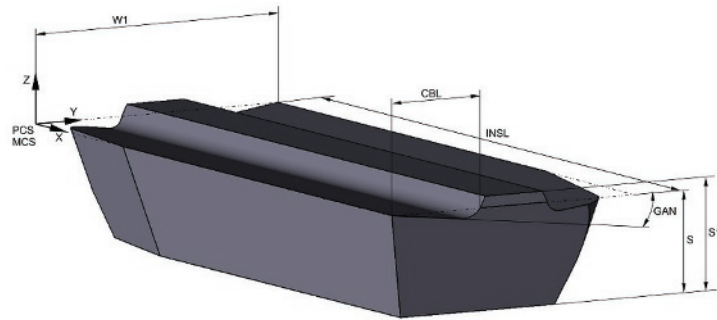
Chip breaker geometry of a reaming insert with two cutting edges and rounded plug chamfer
